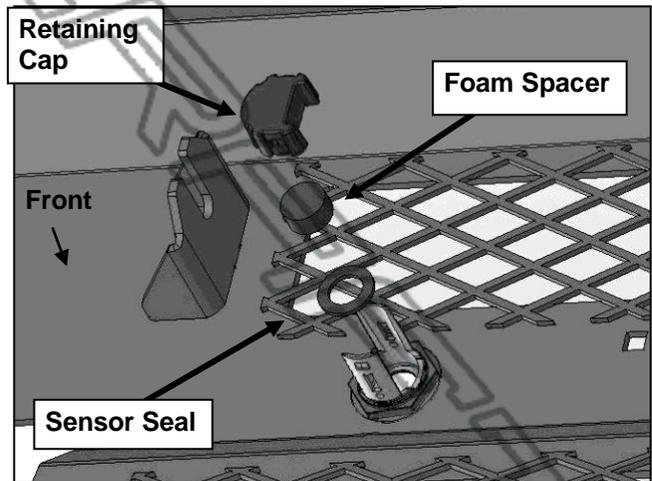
Disassemble bumper to remove fog light assembly , wiring harness and sensors. Note location of each sensor for reinstallation
